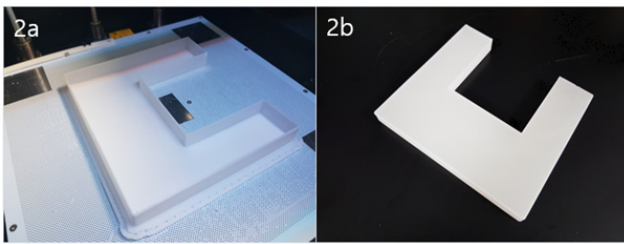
Silicone pad construction: (2a) a mold printed by 3Dprinter, (2b) Fabricated silicone pad on lab-based condition
